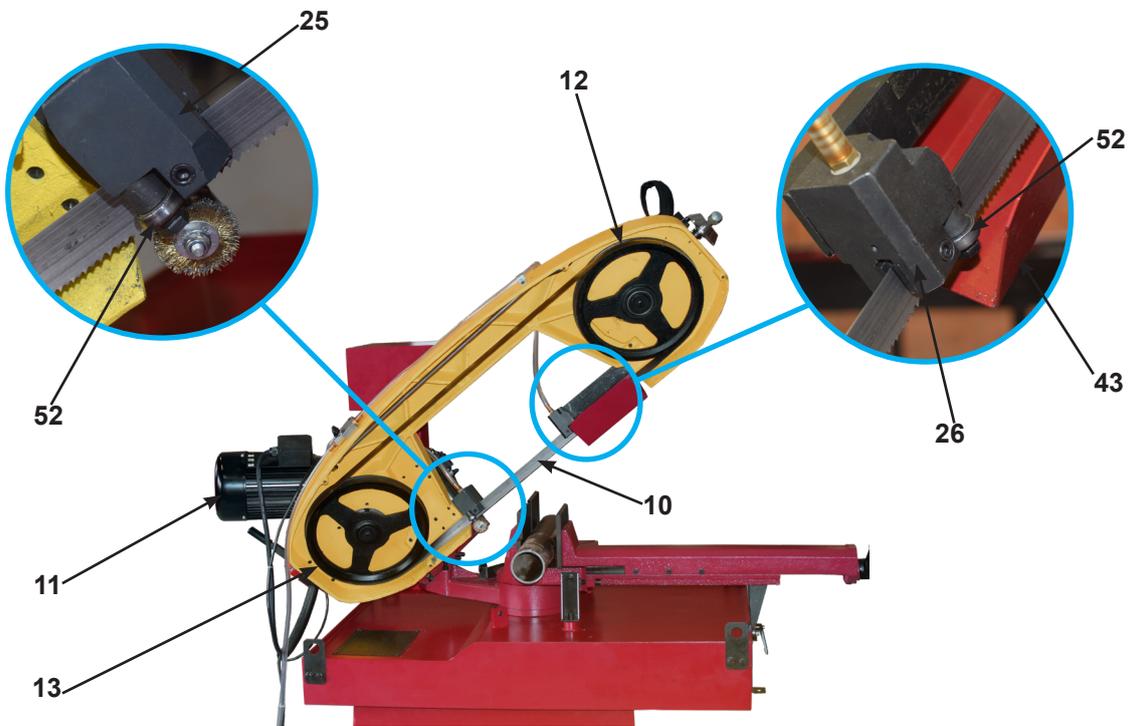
FLYWHEELS ASSEMBLY
